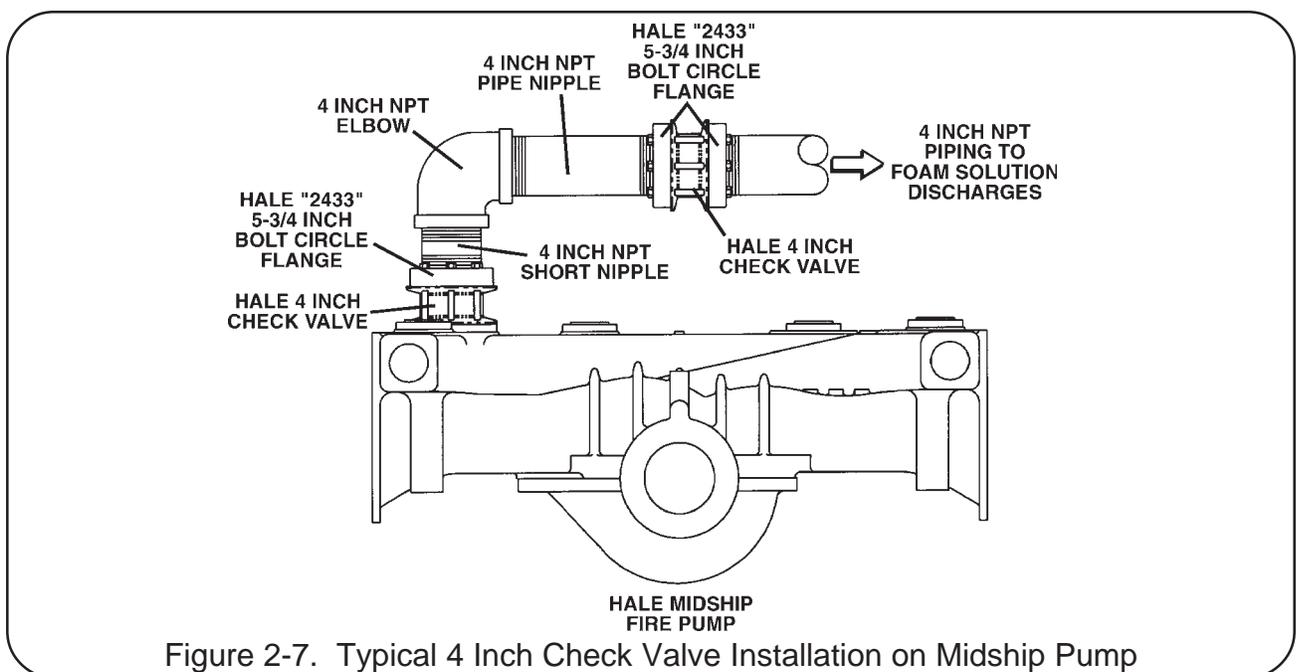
Typical 4 Inch Check Valve Installation on Midship Pump
